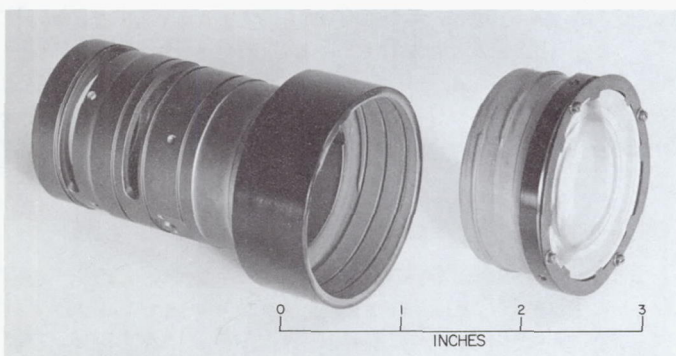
Lens sleeve lubricated with Lubeco 905 after burnishing (R103292)
